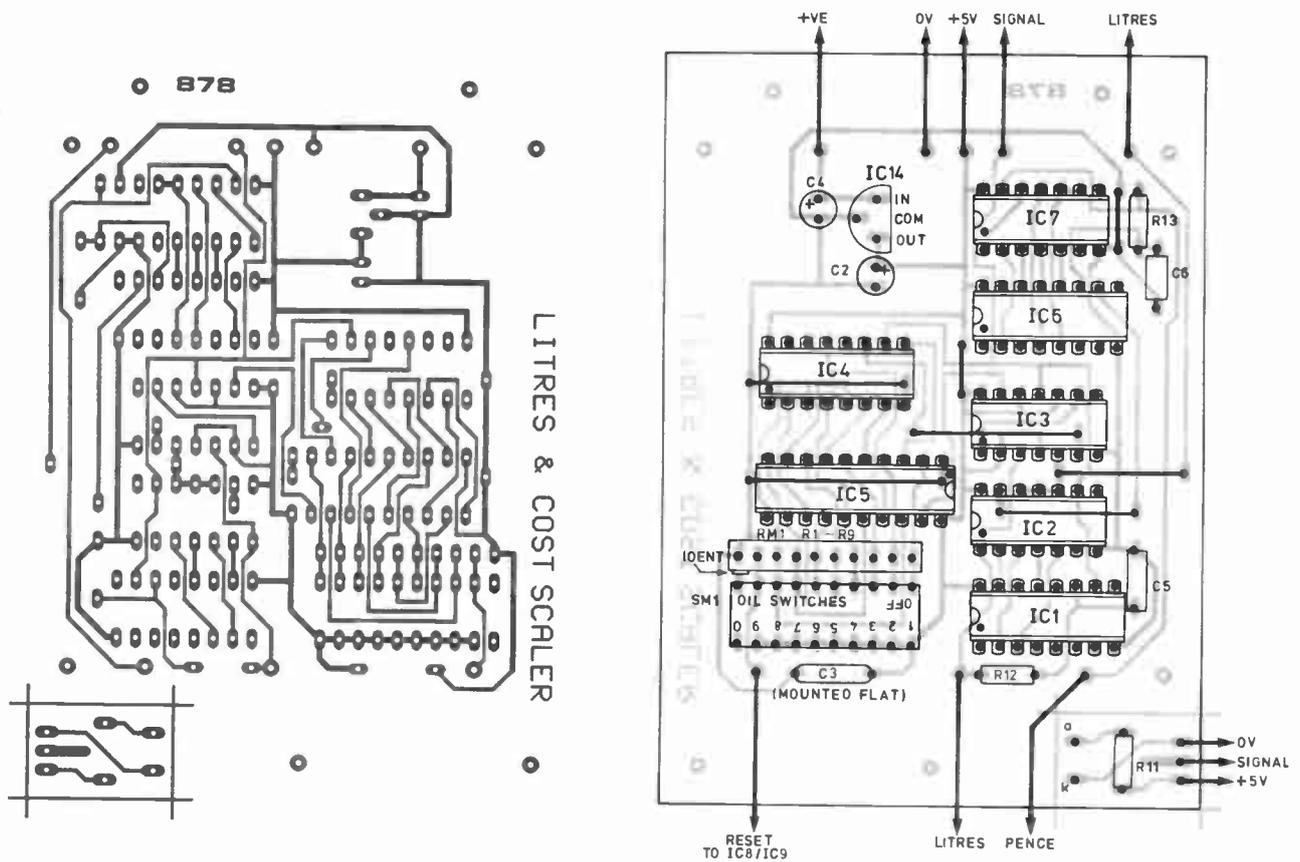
Printed circuit board component layout and full size copper foil master pattern for the Litres and Cost Scaler board. Note that the sub-assembly board, shown at one corner, is mounted trackside upwards on the Sensor module, looking at the connecting pins.
